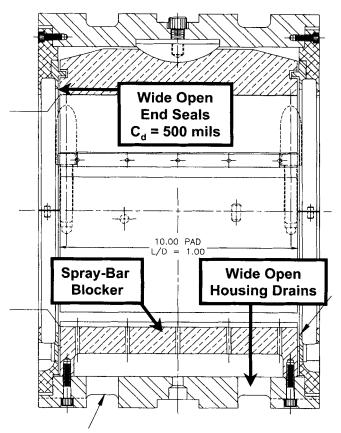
54,000 HP Pinion Bearing, Evacuated Housing with Spray-Bar Blocker.
